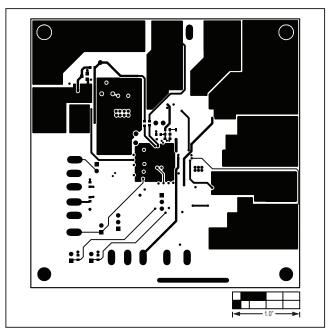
MAX17085B EV Kit PCB Layout—Solder Side
